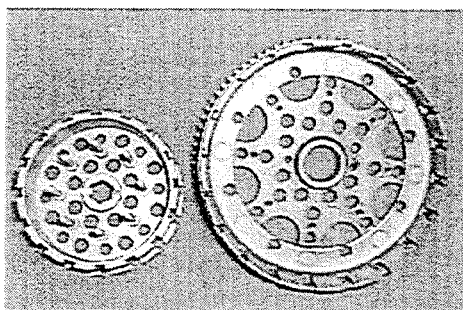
Lightened clutch components by drilling holes using inexpensive tungsten carbide drill bits
